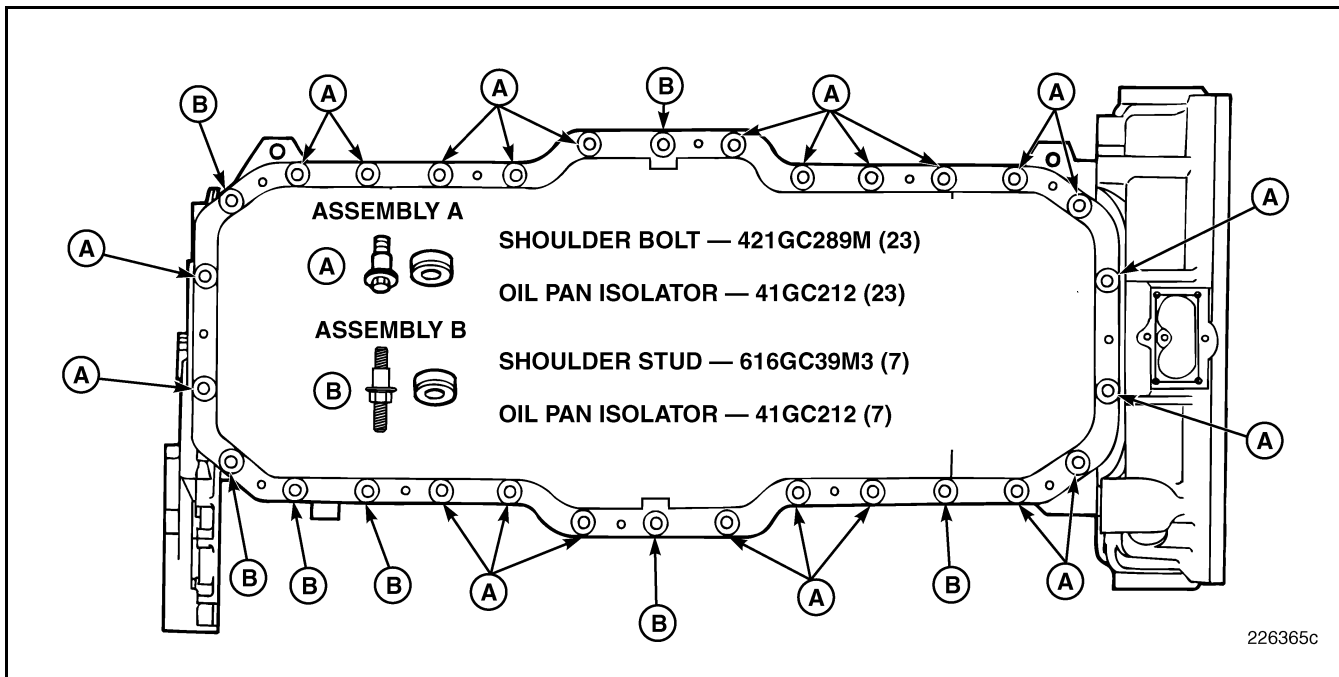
Isolating Oil Pan Hex-Head Shoulder Bolt (A) and Shoulder Stud (B) Locations
